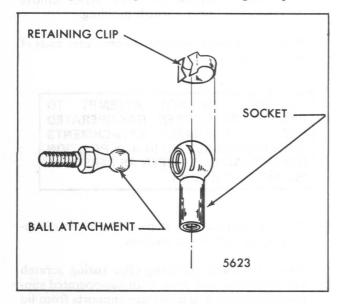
Support Assembly Retaining Clip - "H-07, 77" and "X-17" styles
